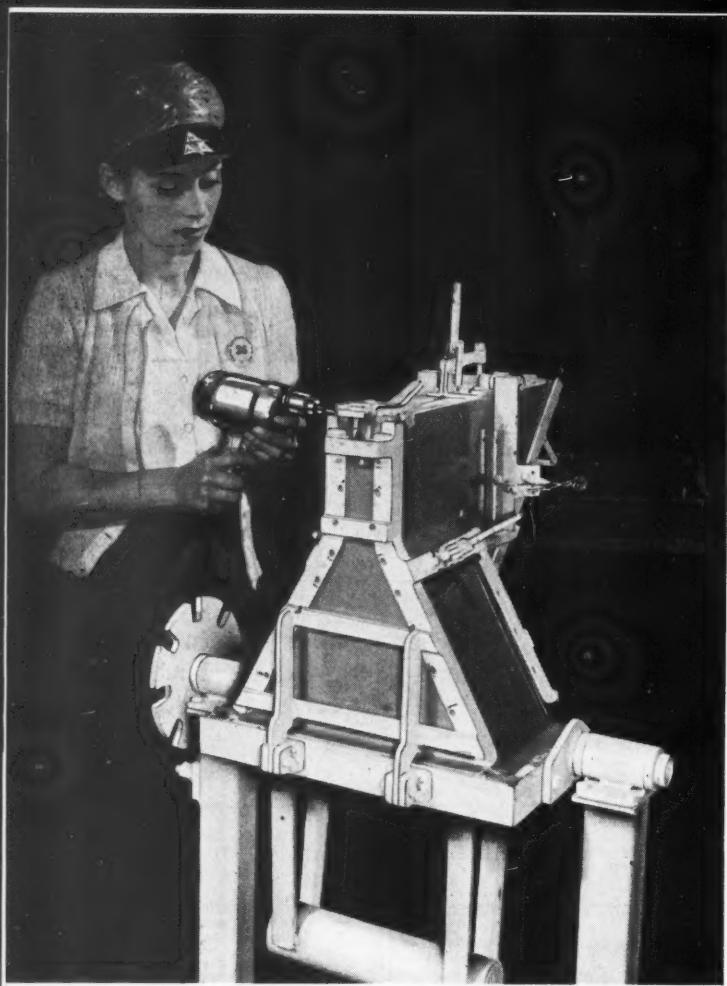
Fixtures for drilling fabricated laminated plastic parts insure the alignment of holes in assembling mating pieces.
